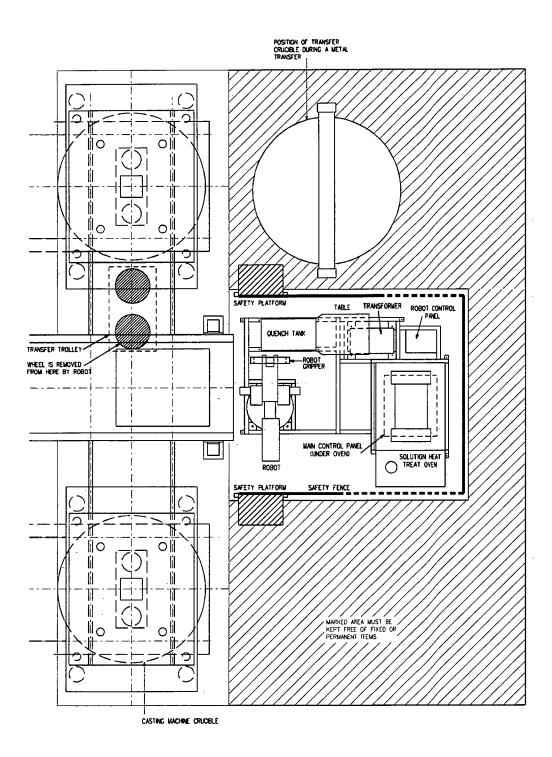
Top View of Experimental Heat Treatment Cell and Casting Machine Set-Up
